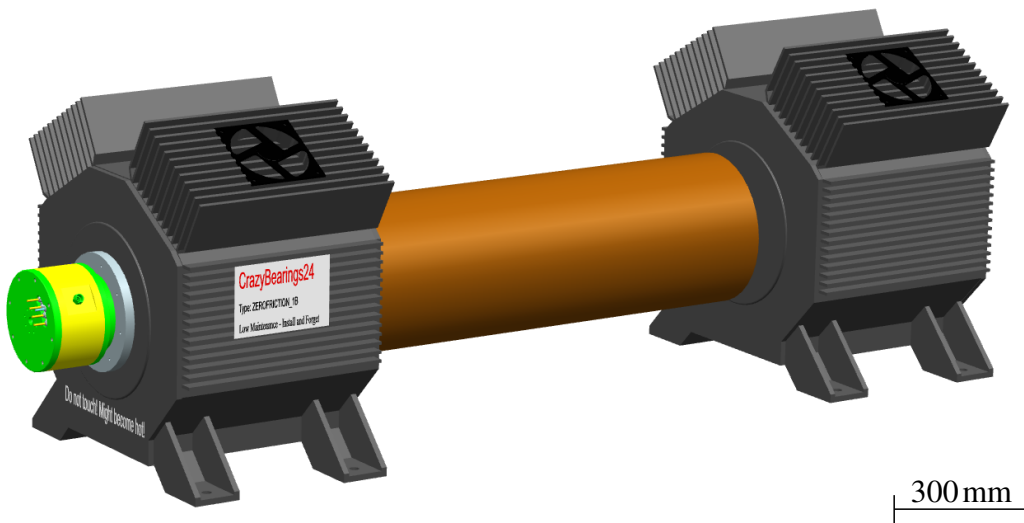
Anticipated outline of magnetic bearings with the same minimum stiffness as the hydrostatic bearings, shown with the printing roller in between. The bearings have a length of 660mm.
